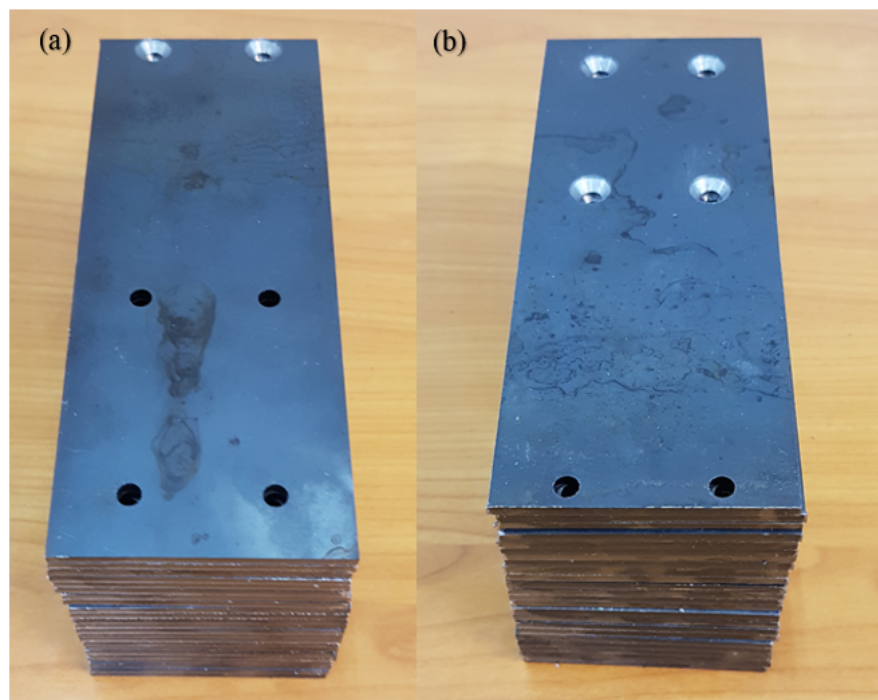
24 pieces of 3 mm plates countersunk to be connected to a) cross flexures, b) triangular blocks.
